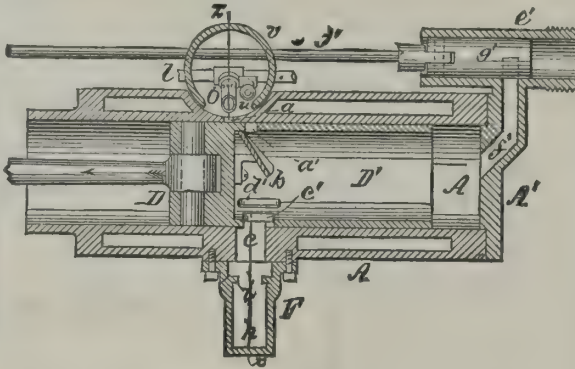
LONGITUDINAL VIEW OF GAS ENGINE.
